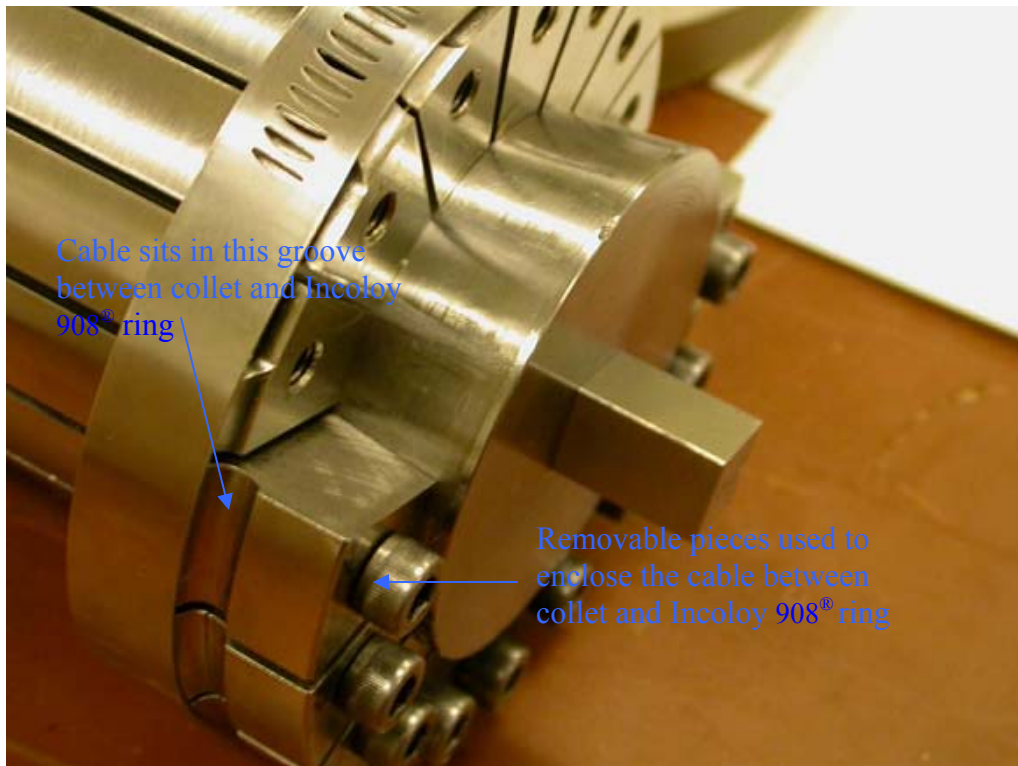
Expanding collet with stainless steel cone used during heat treatment.
